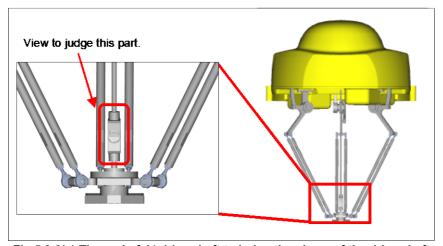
(a) The end of J4 drive shaft to judge the phase of the drive shaft
